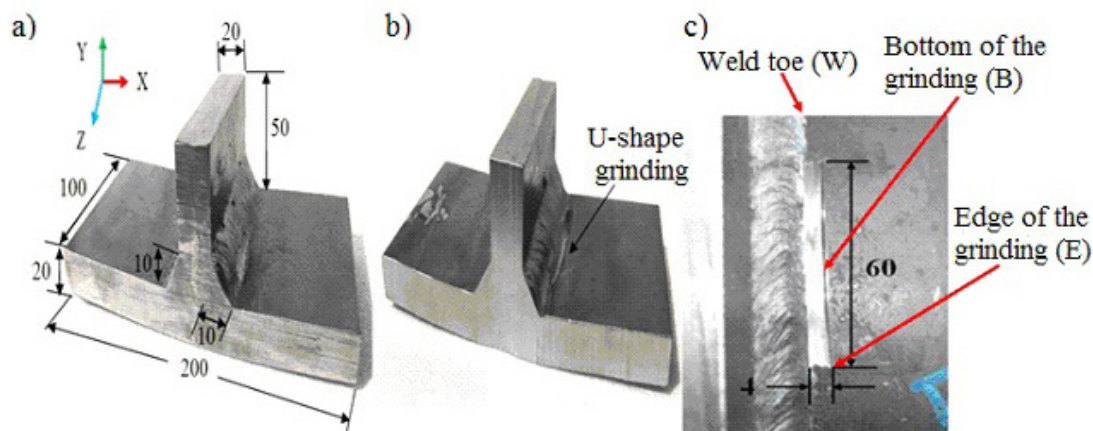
T-welded connection: (a) intact; (b) with U-shape grinding; and (c) critical regions of the U-shape grinding (units in mm).
